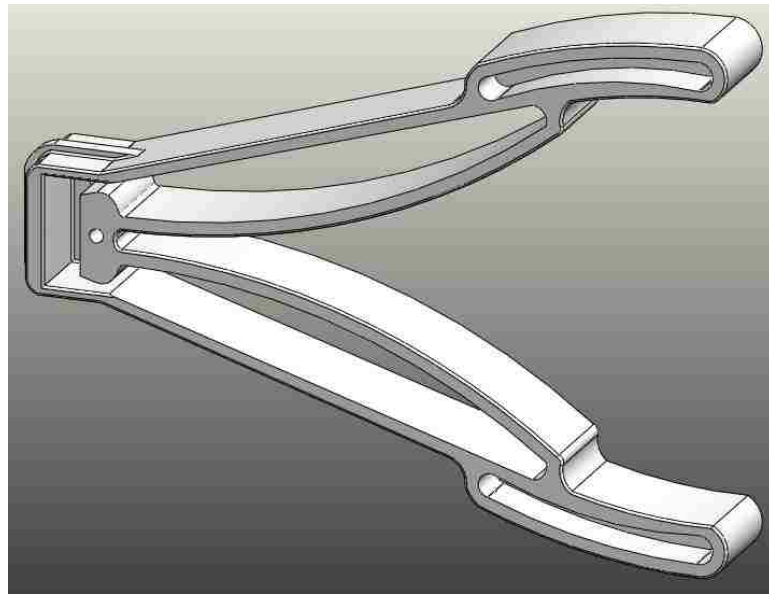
CAD Rendering of the Crimping Mechanism Designed by AMP, Inc.
